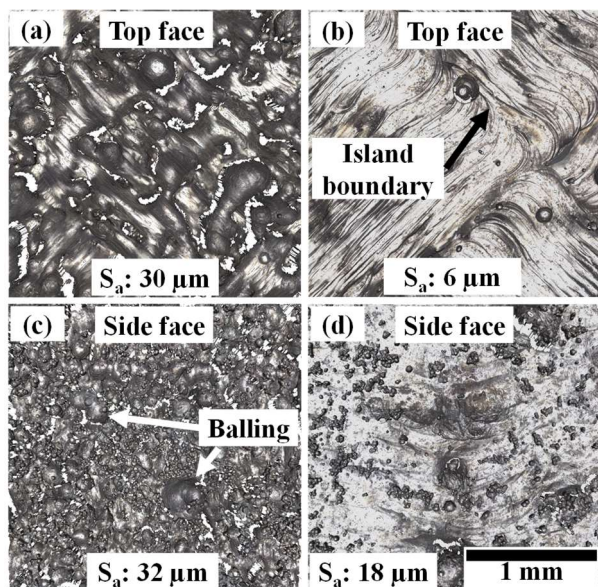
Surface topographies of as-built SLM parts, taken on top faces after (a) Test 1; (b) Test 15 and on side faces following (C) Test 1; (d) Test 11.
